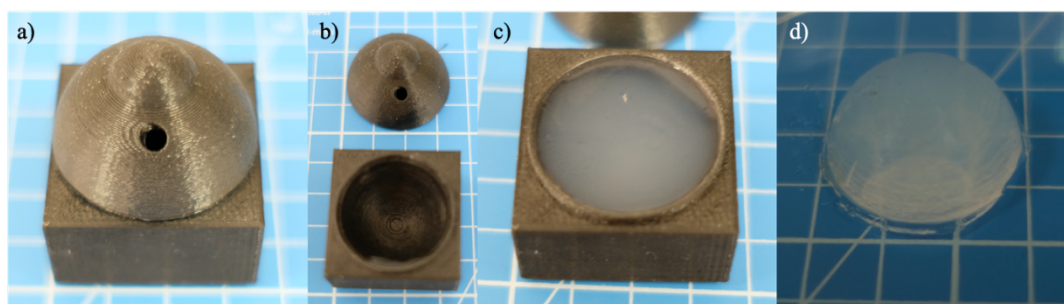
a) 3D printed mold (conjoined) b) two separate parts of the mold c) the *in vitro* eye model before being removed from the mold d) *in vitro* eye model after removed from the mold
